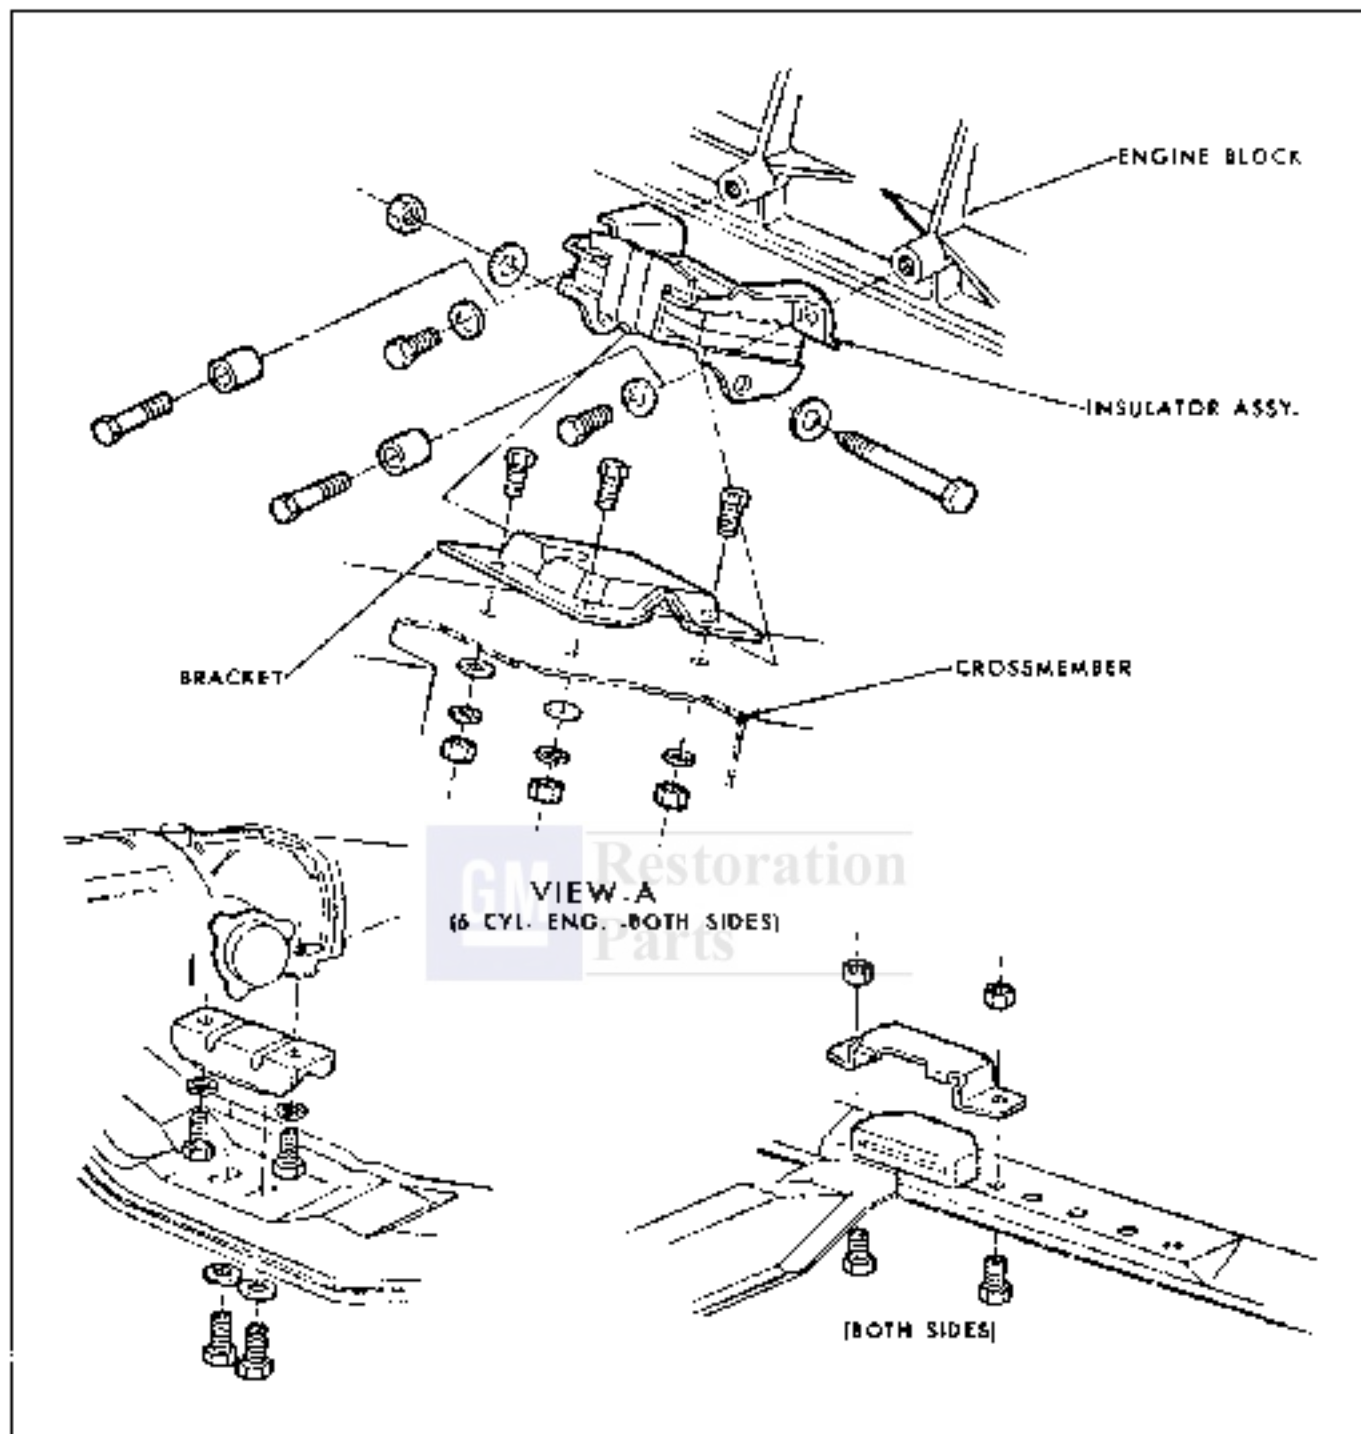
6 Cyl. Engine Mounting—Tempest
